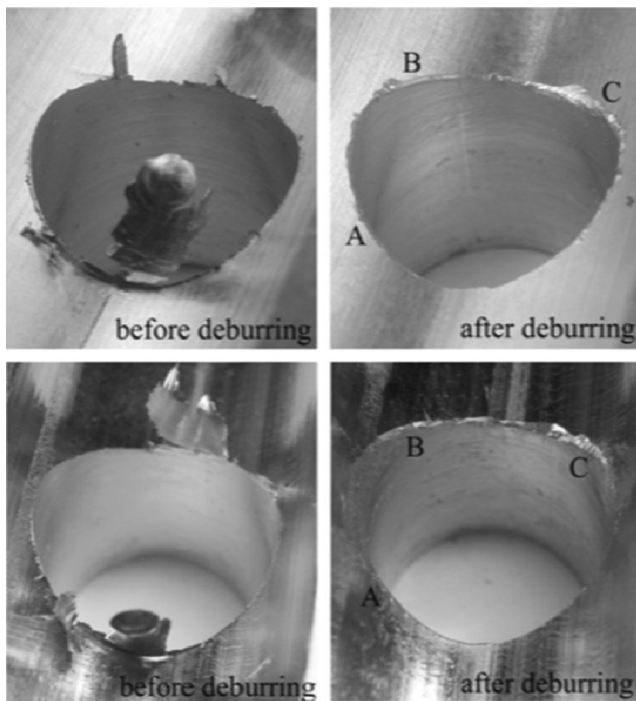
Drilling edges before and after deburring in 6061-T6 aluminum specimens (Adapted from [99])
